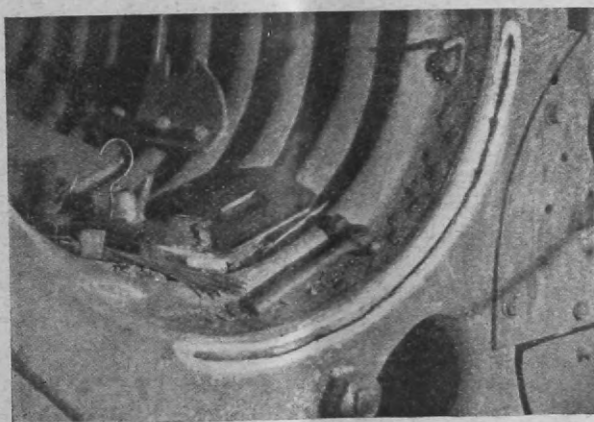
CRACK IN BOILER BEFORE ARC-WELDING.
